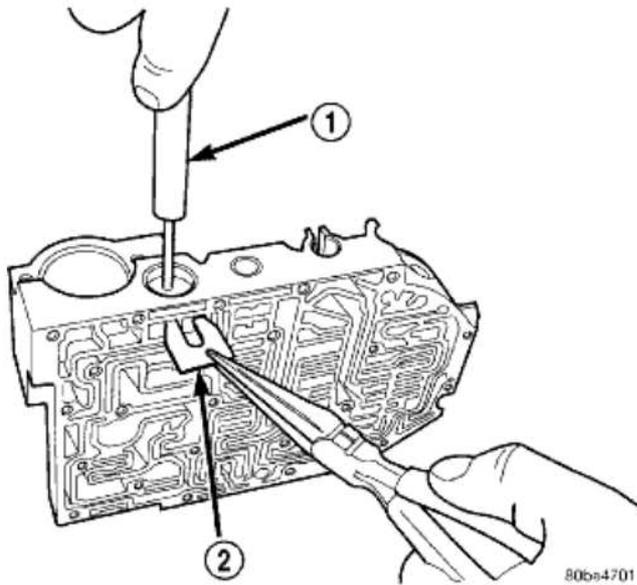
Removing/Installing Regulator Valve Spring Retainer
